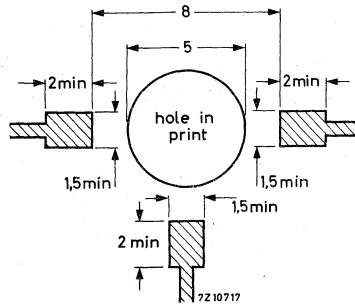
Requirements for fibre-glass print. (Dimensions in mm.)
